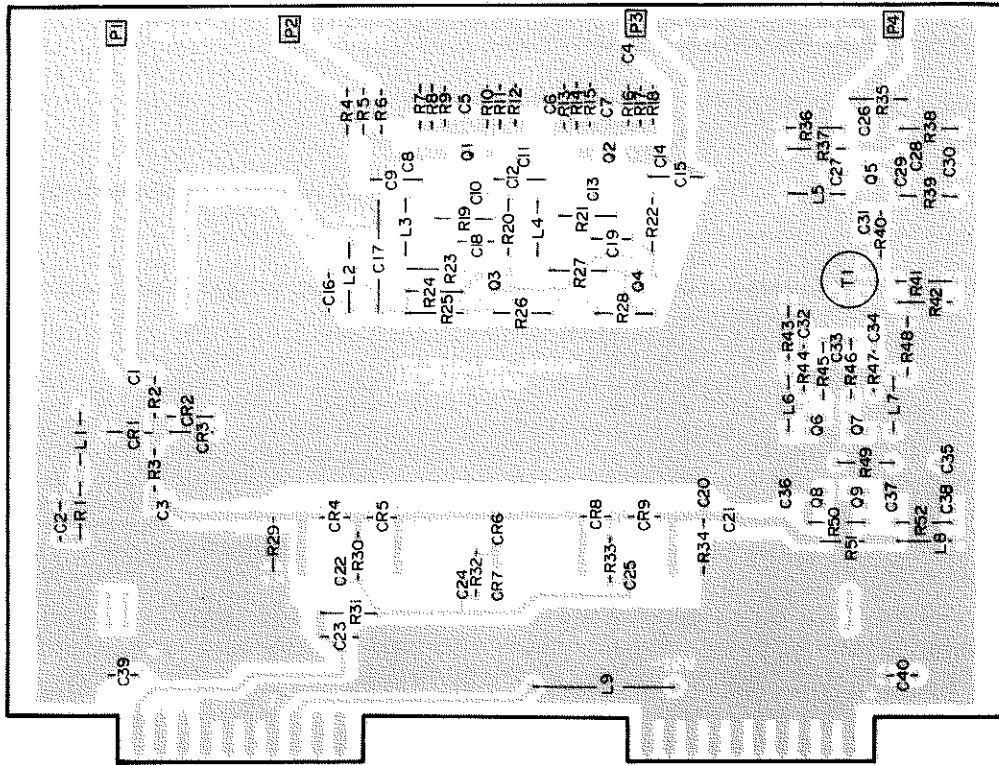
A6 Frequency Doubler Board Assembly Component Locations.
